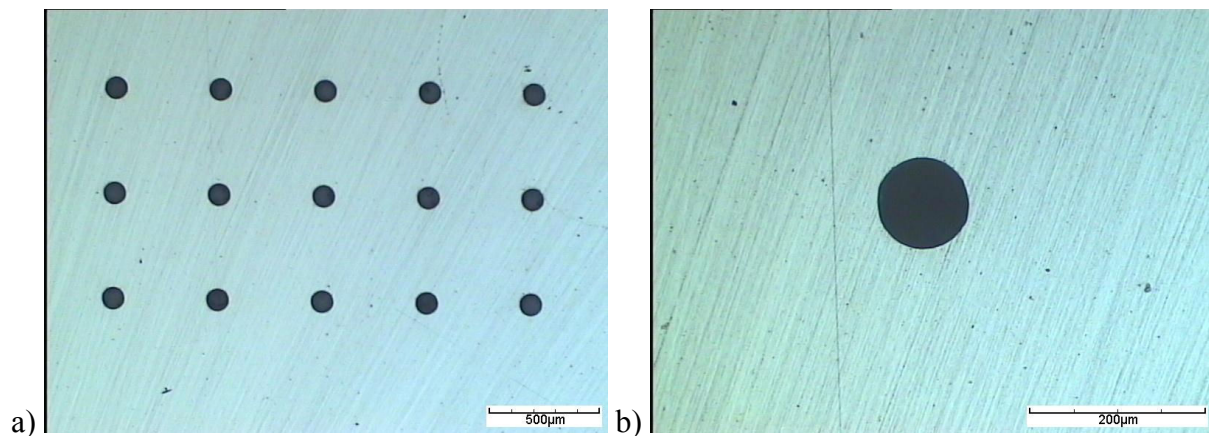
Image of a) 100 μ m hole matrix front side view and b) enlarged view of one hole
